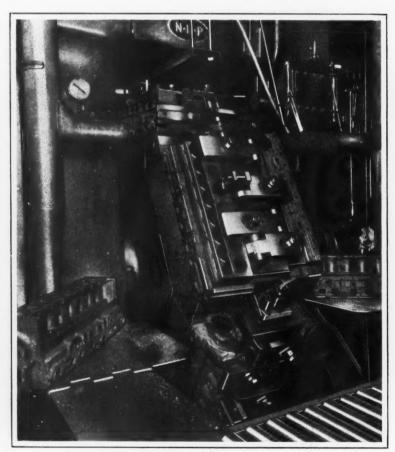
Continuous Drum Type Machine, Two of which are Employed for Rough- and Finish-milling the Cylinder Blocks
